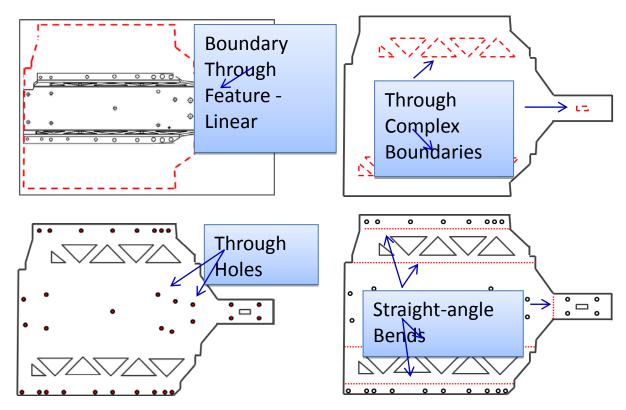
6: Example features identified in the chassis part for process selection. Note that the starting material is assumed to be a flat plate.
